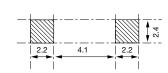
CSM-8A — Recommended Solder Pad Layout Top view
